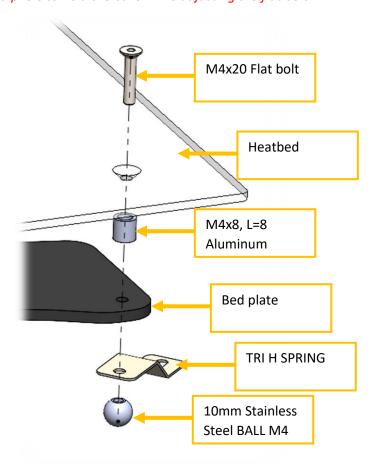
Detail of front holes of heatbed assembly, repeat on the left side
